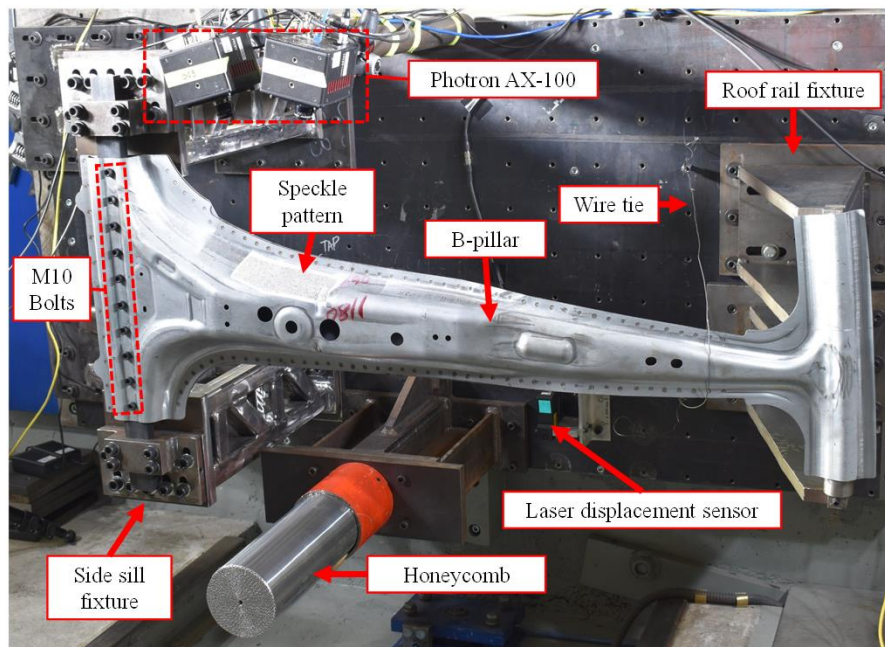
Fully assembled fixture with the B-pillar attached for impact testing
